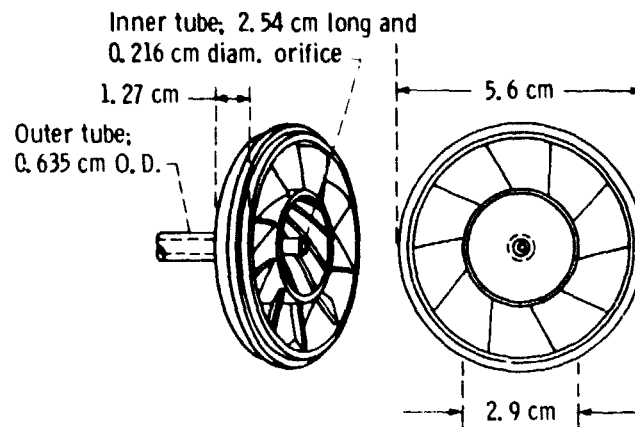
70° axial swirler (open area of 15.5 cm²) mounted on 0.635 cm O.D. tube.
